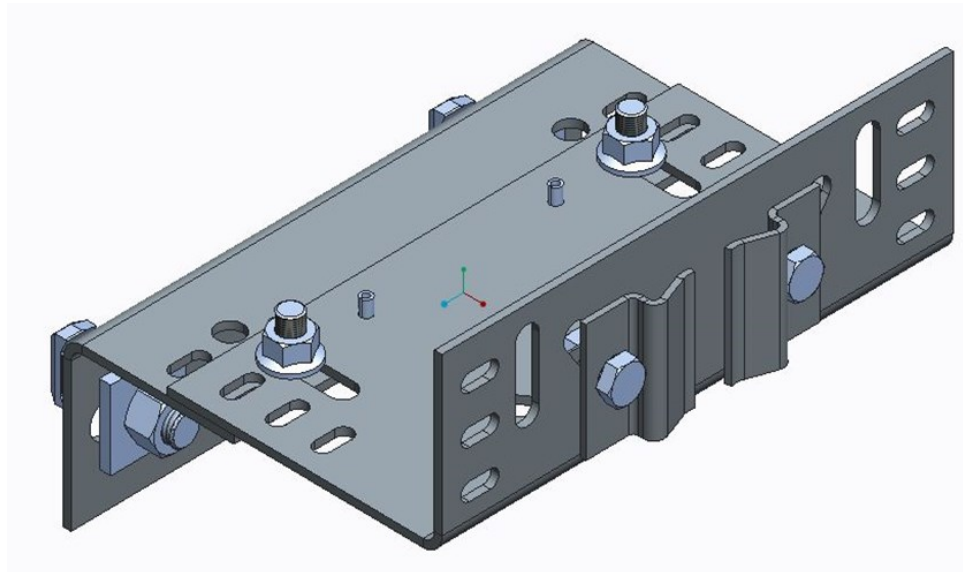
Single car bracket (KONE Design Components, KM657567G01)
